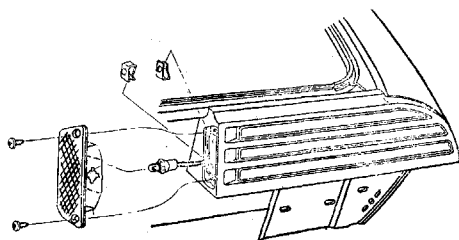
Exterior Lamp Installation - Pontiac Styles
